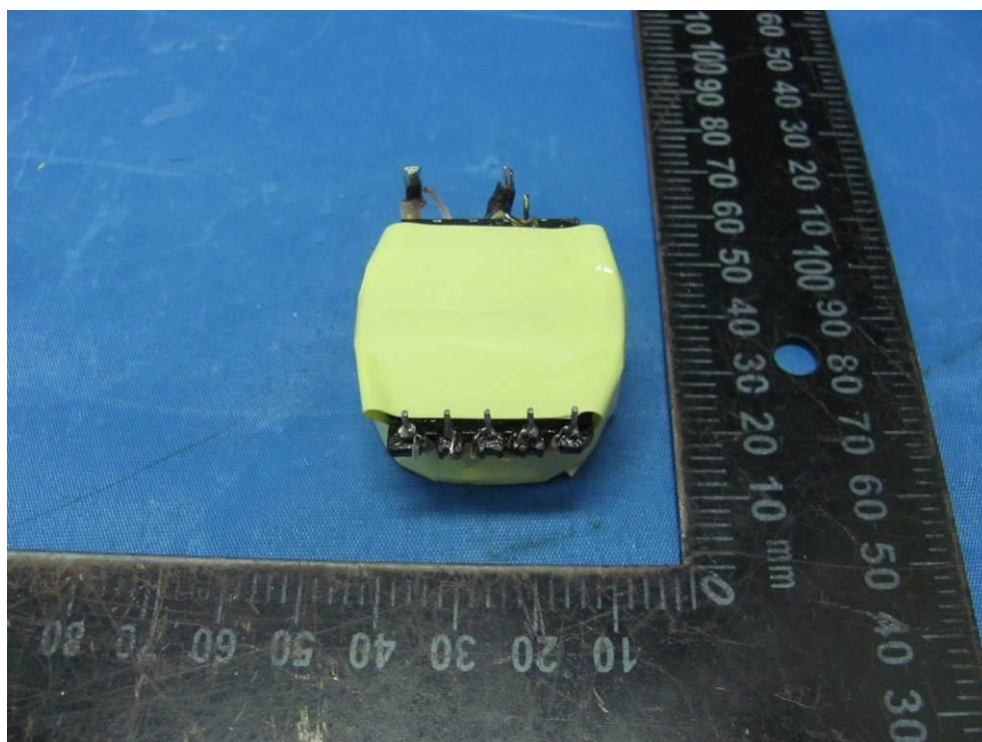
GT*41133 series External view of mains transformer (shield copper foil)
